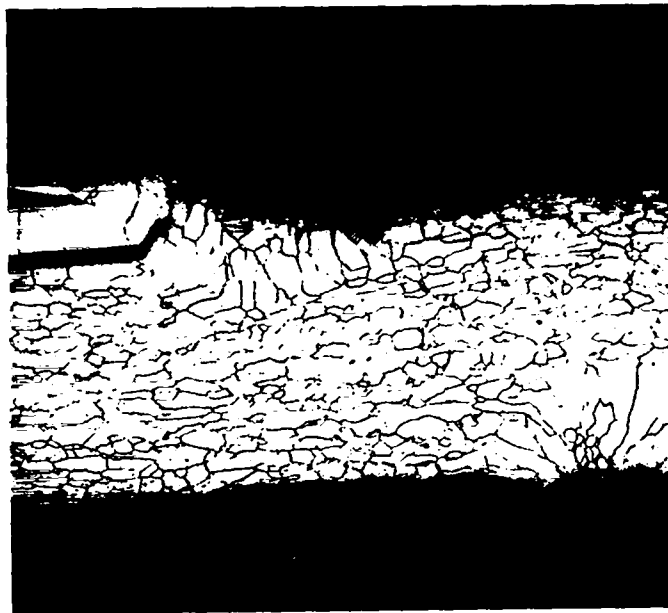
One side of the L-24 vent assembly weld was cracked; etched, 50X.
